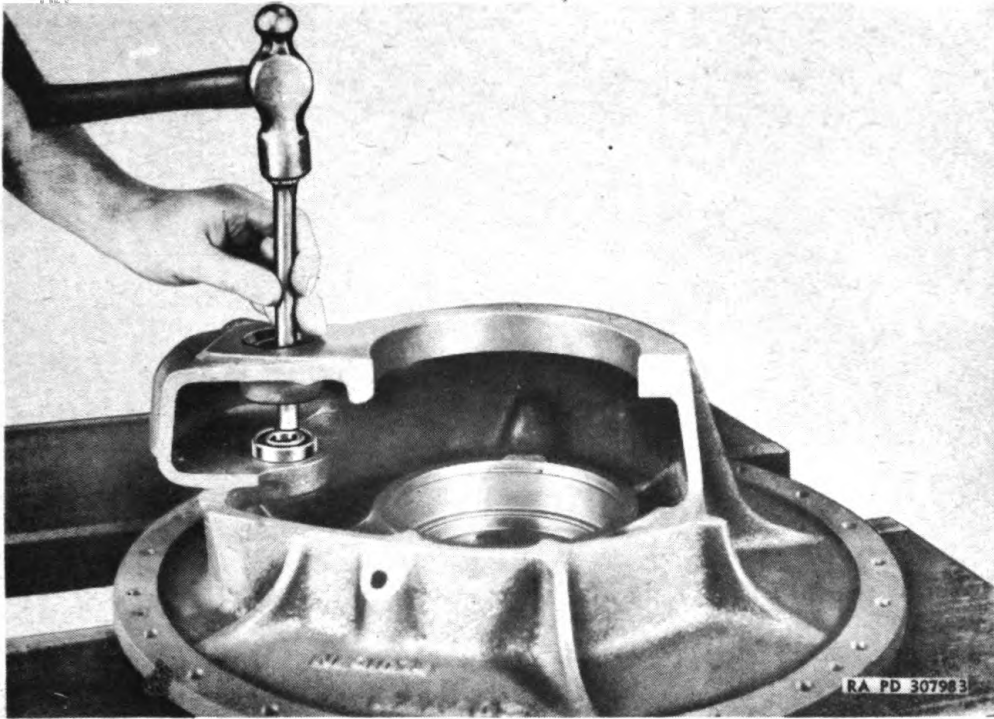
Installing Inner Pump Drive Shaft Bearing
